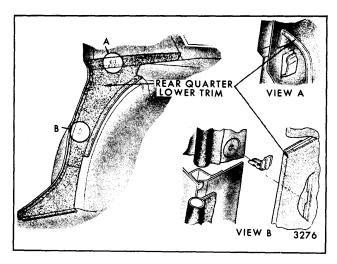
Rear Quarter Trim Assembly - "C" Four-Door Style
